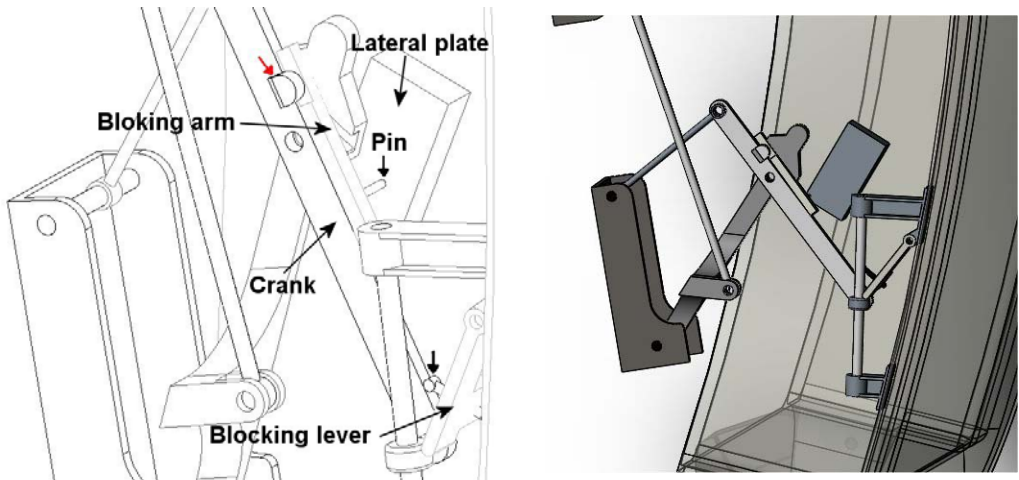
The complete assembly of door opening mechanisms in two different views
